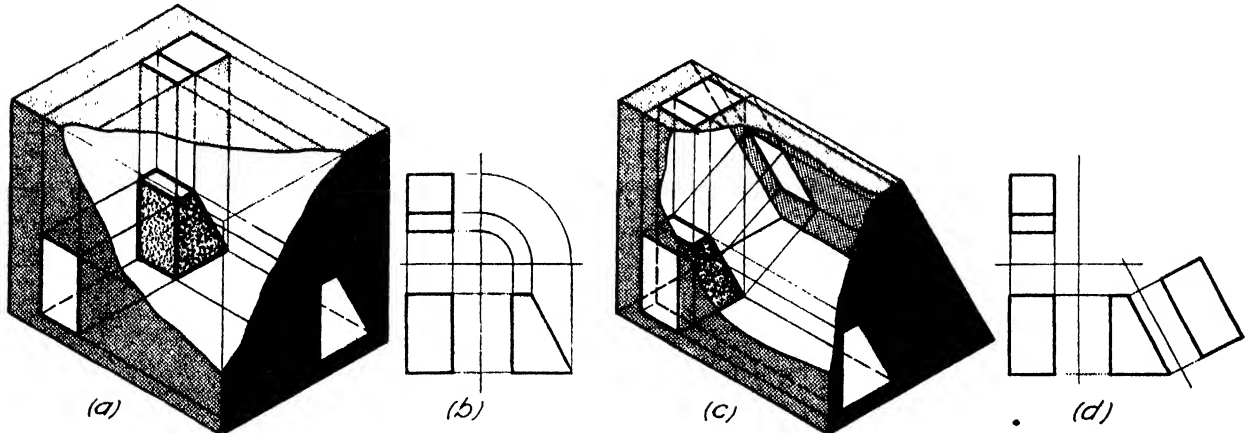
Auxiliary plane perpendicular to the profile plane.
